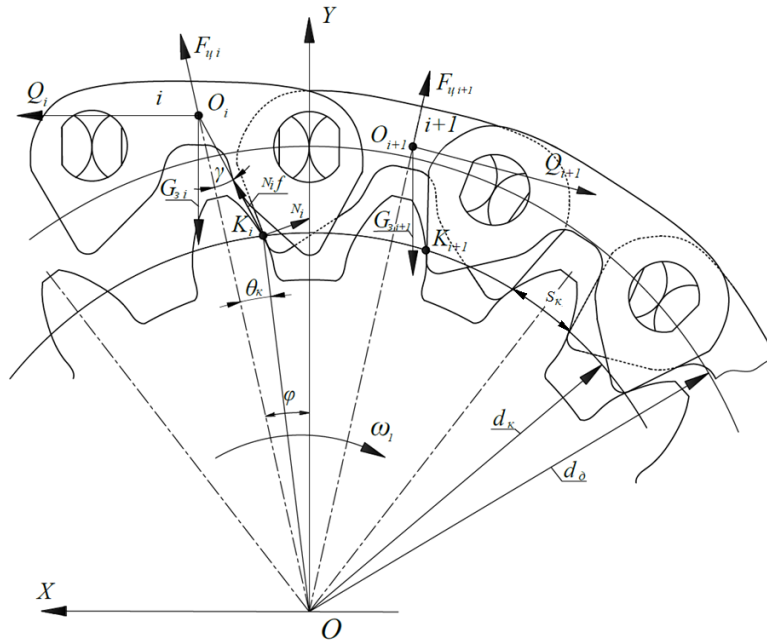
Arrangement of plates in engagement with the involute sprocket teeth
